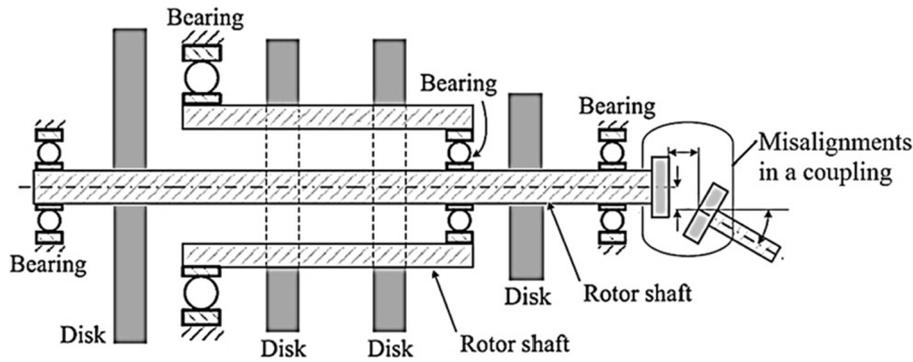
Sketch of a dual-rotor aeroengine system adapted from [1].
